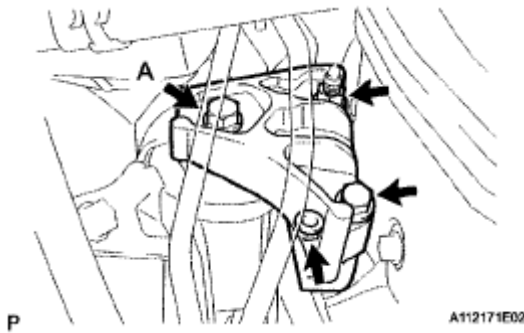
Locating Engine Mounting Insulator RH With Bolts And 2 Nuts
